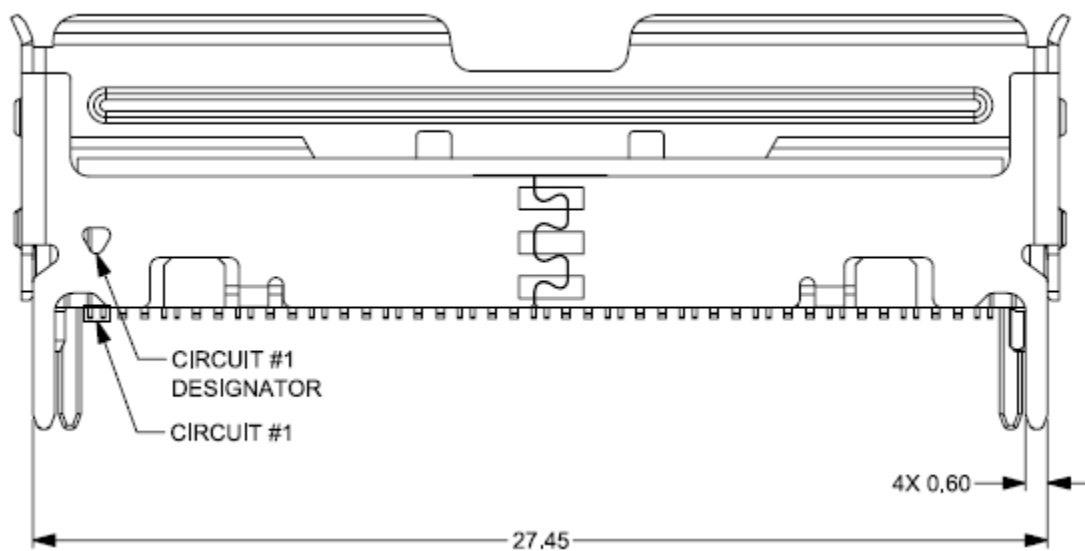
72-Pin Front View of Fixed-Side Connector Cage
